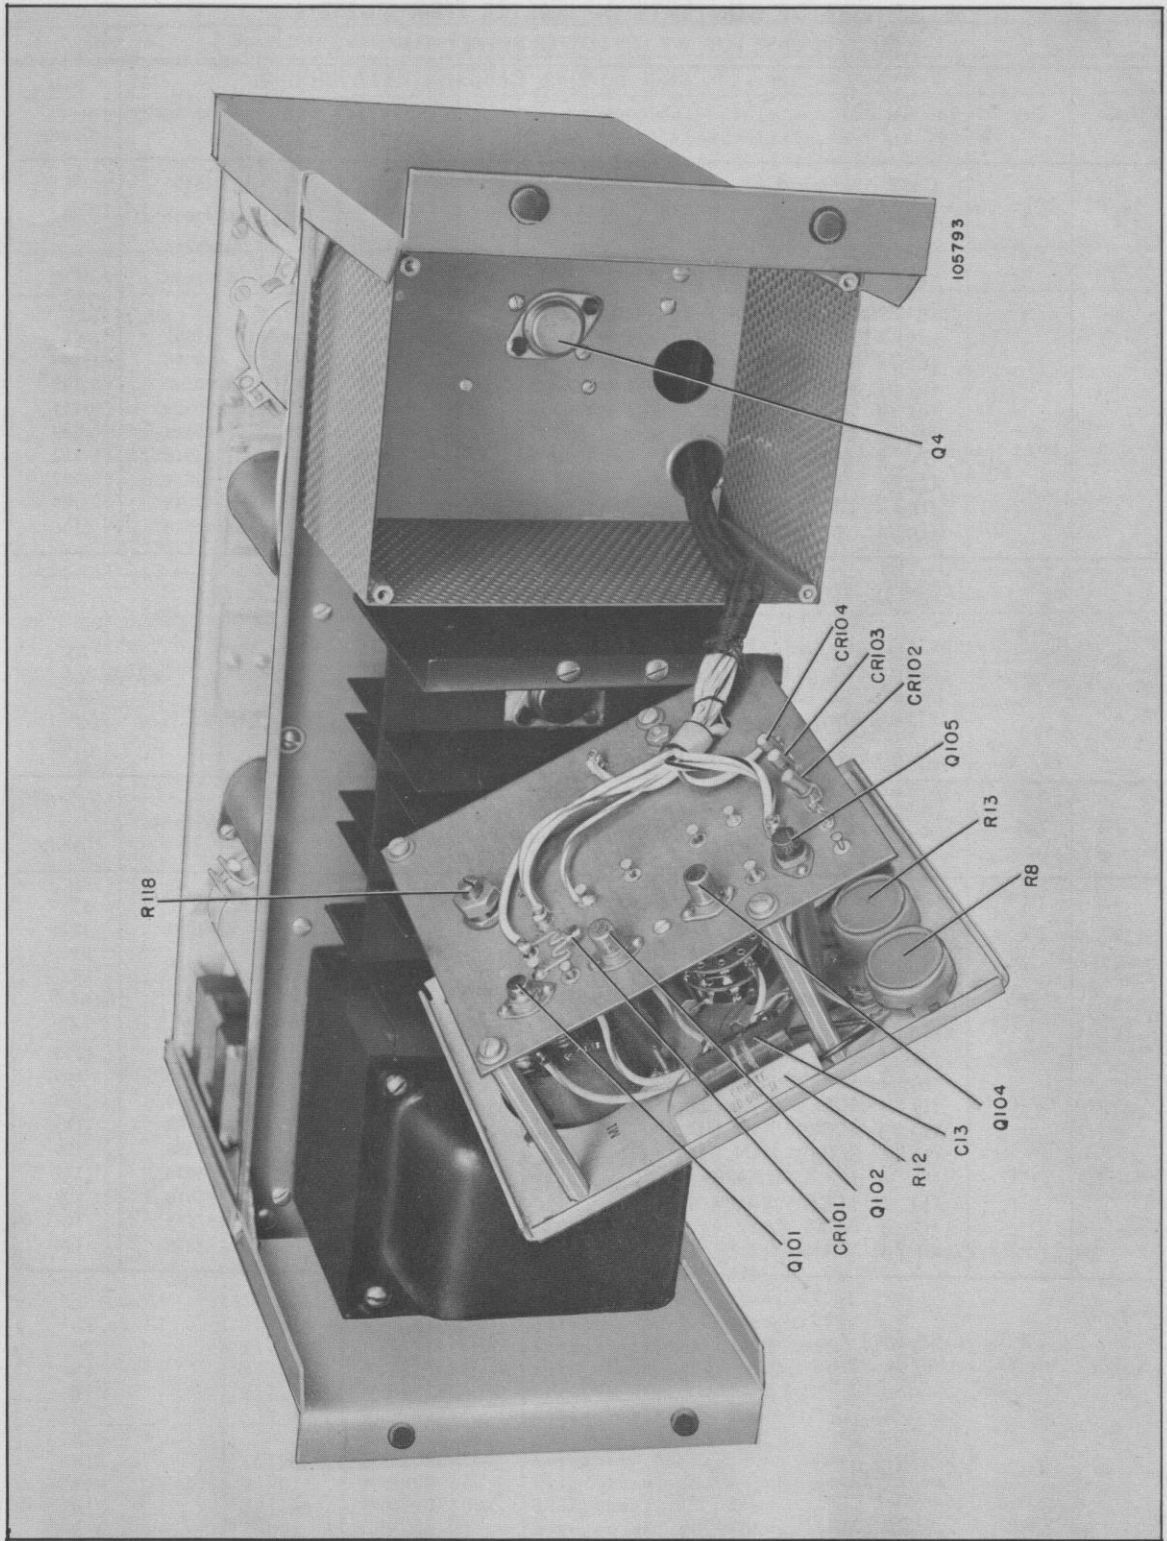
Rear View of Assembly Board, Front Panel Removed from Main Chassis
